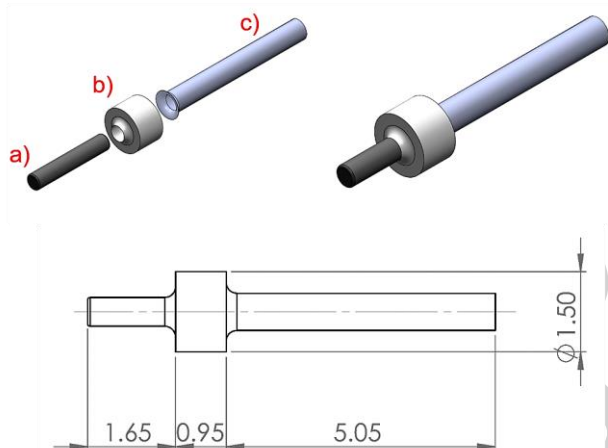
Micro assembly three dimensional model and main dimensions in mm. (a): Magnet rod. (b): TPE micro-ring. (c): Aluminum cantilever.
